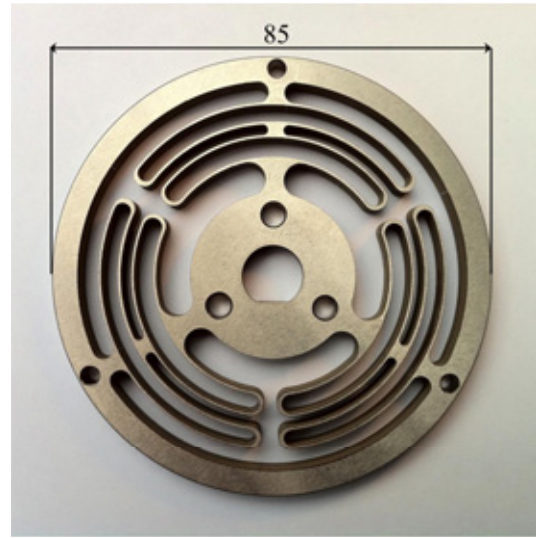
Frontal view of the custom made torsional elastic module. Diameter: 85 mm. Thickness: 3 mm. Weight: 61.5 g.
